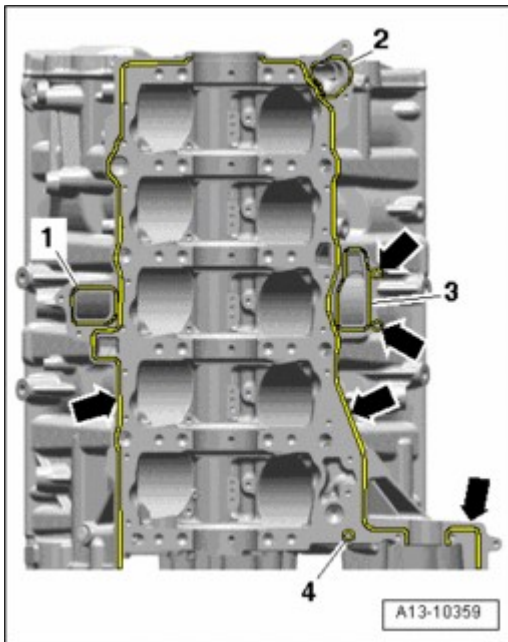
Guide Frame Sealant Application On Cylinder Block
